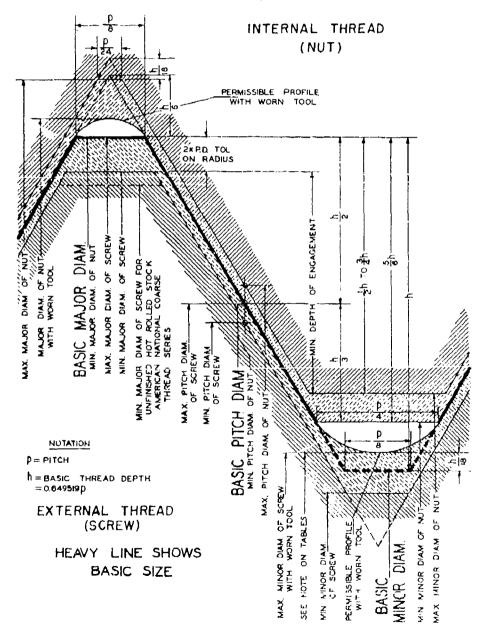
Disposition of tolerances and crest clearances for class 2.
